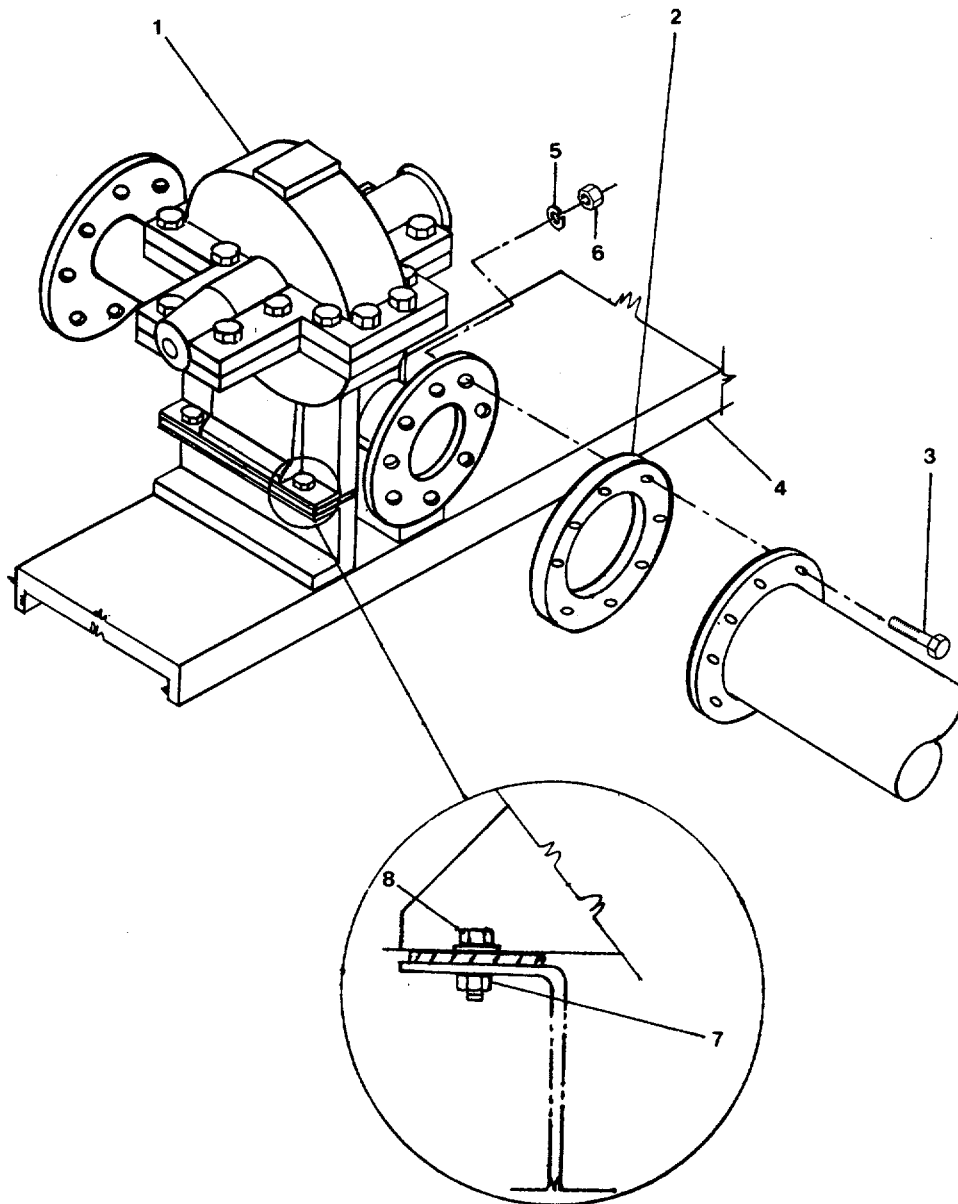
Auxiliary Pump Assembly Replacement.
